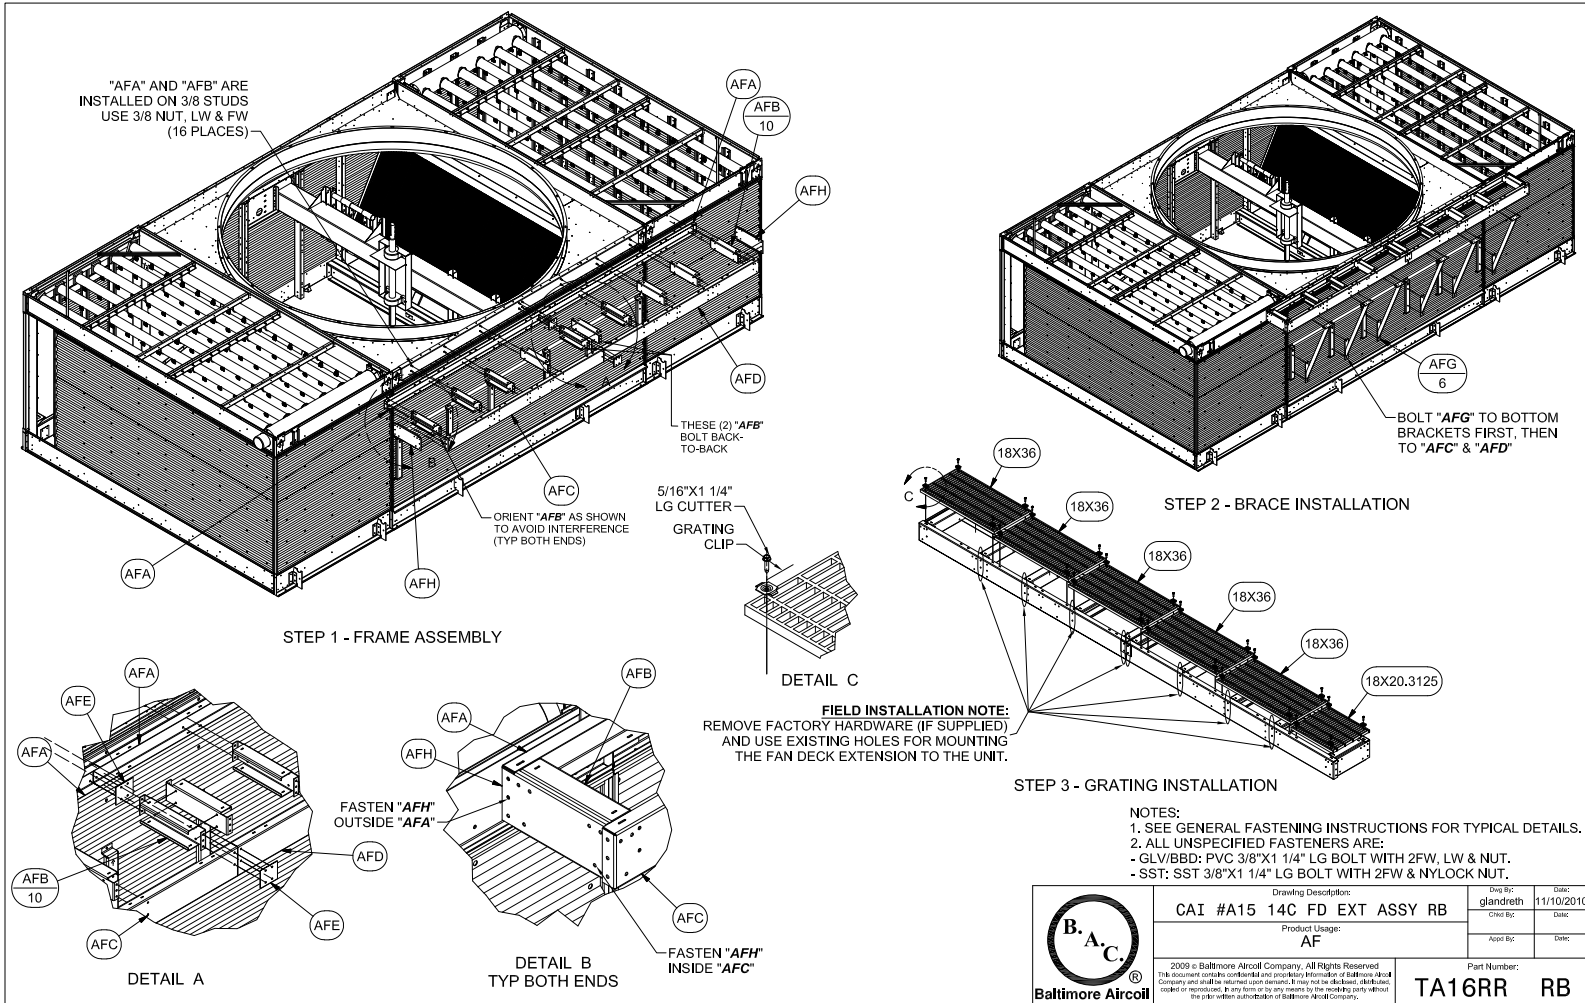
TA16RR Fan Deck Extension Installation 14' Units
